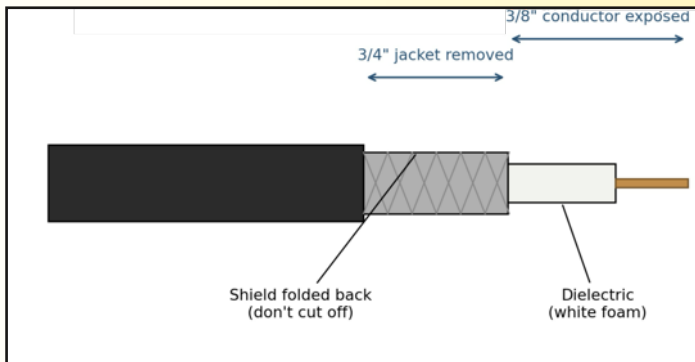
Strip dimensions: 3/4" of jacket, 3/8" of exposed conductor, shield folded back.
